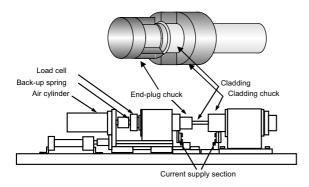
Schematic drawing of pressurized resistance heating and welding apparatus.
